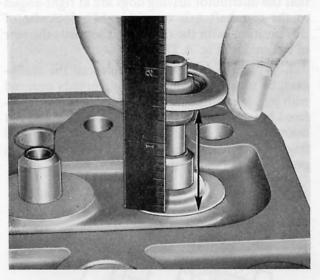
Checking valve spring assembled height. Note that the valve spring retainer is installed
